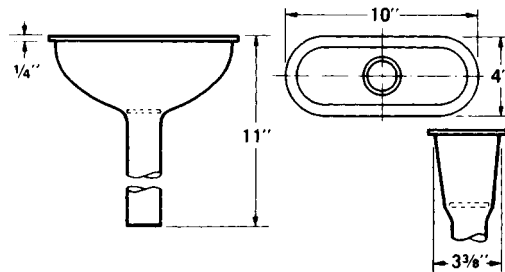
Plain End Outlet 3- by 9-in. Oval
